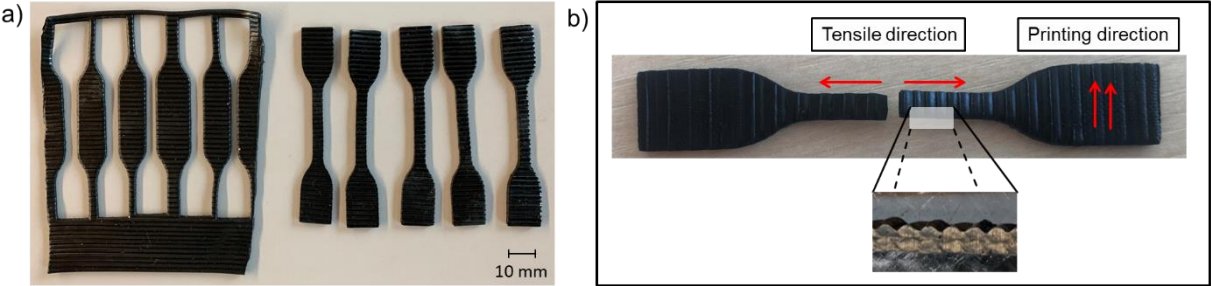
S2 tensile specimens a) Stamped out specimen before vulcanization b) scheme of a single S2 specimen after a tensile test (test direction perpendicular to print direction, parallel printing pattern)
